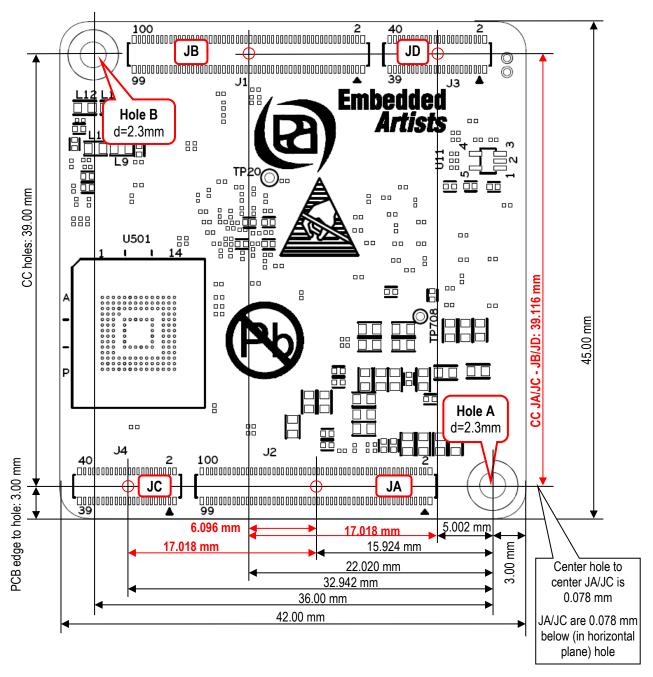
iMX93 uCOM Board Mechanical Outline, View from Bottom Side
